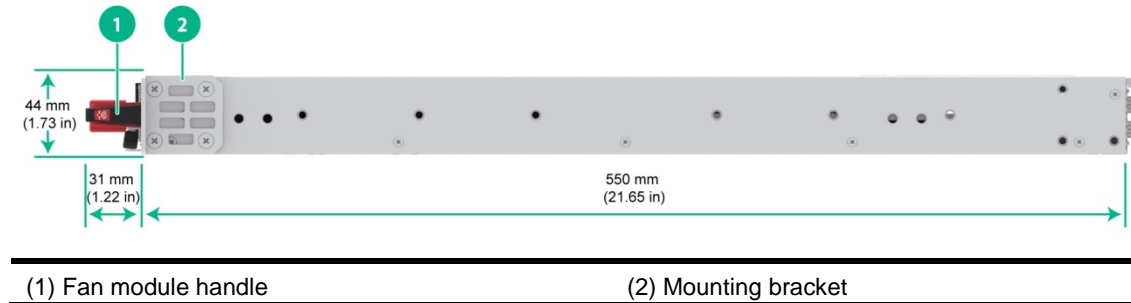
S9855-40B switch dimensions with mounting brackets installed at the power supply side
